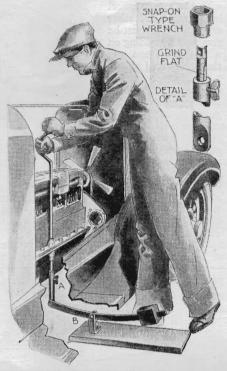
Time and effort are saved by rigging mechanical assistant in turning oil pan nuts.
